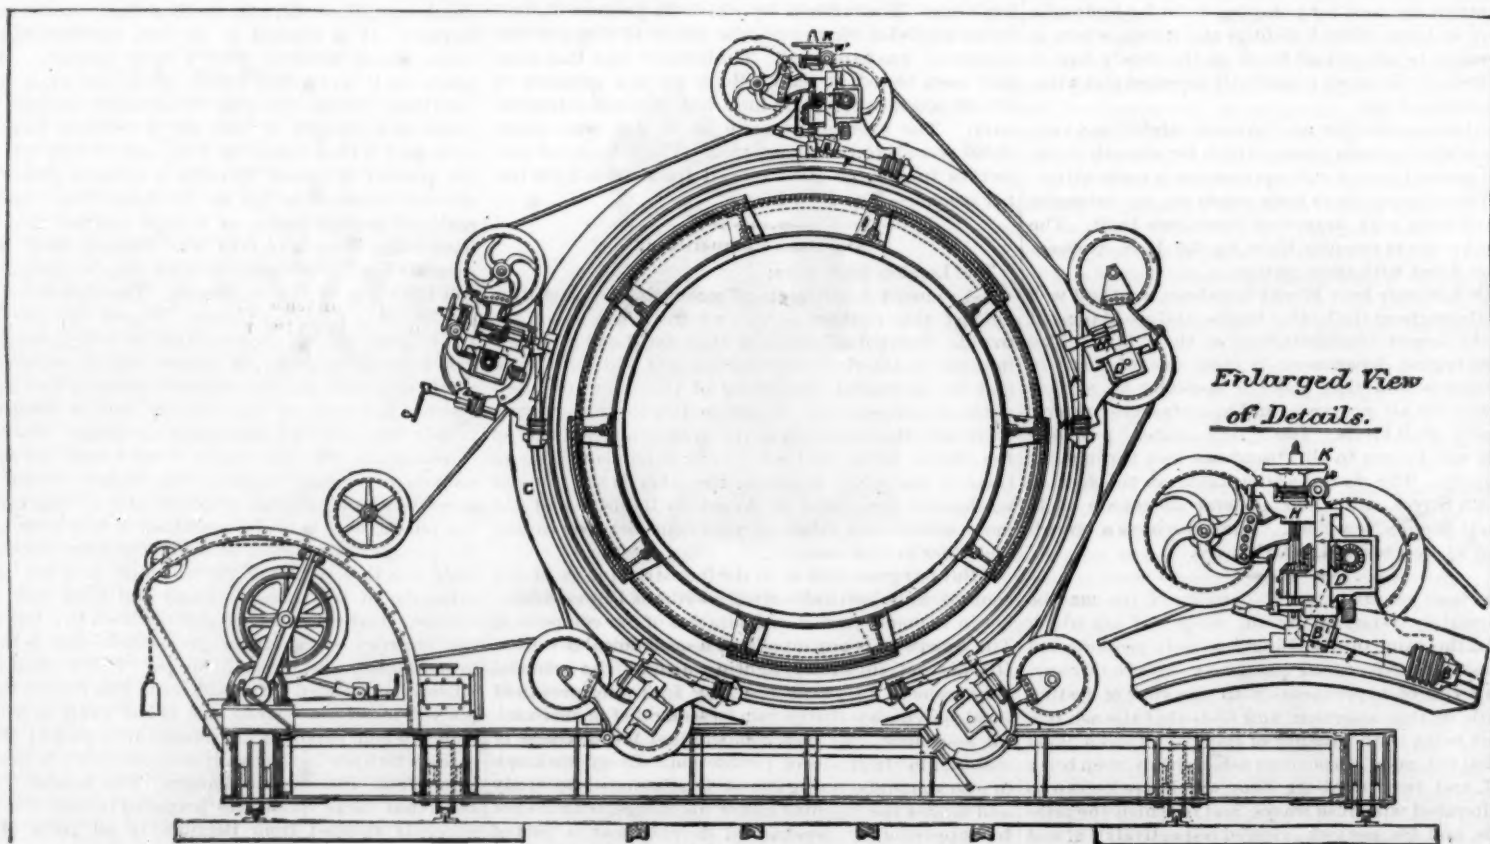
SECTION OF TUBE DRILLING MACHINE.
